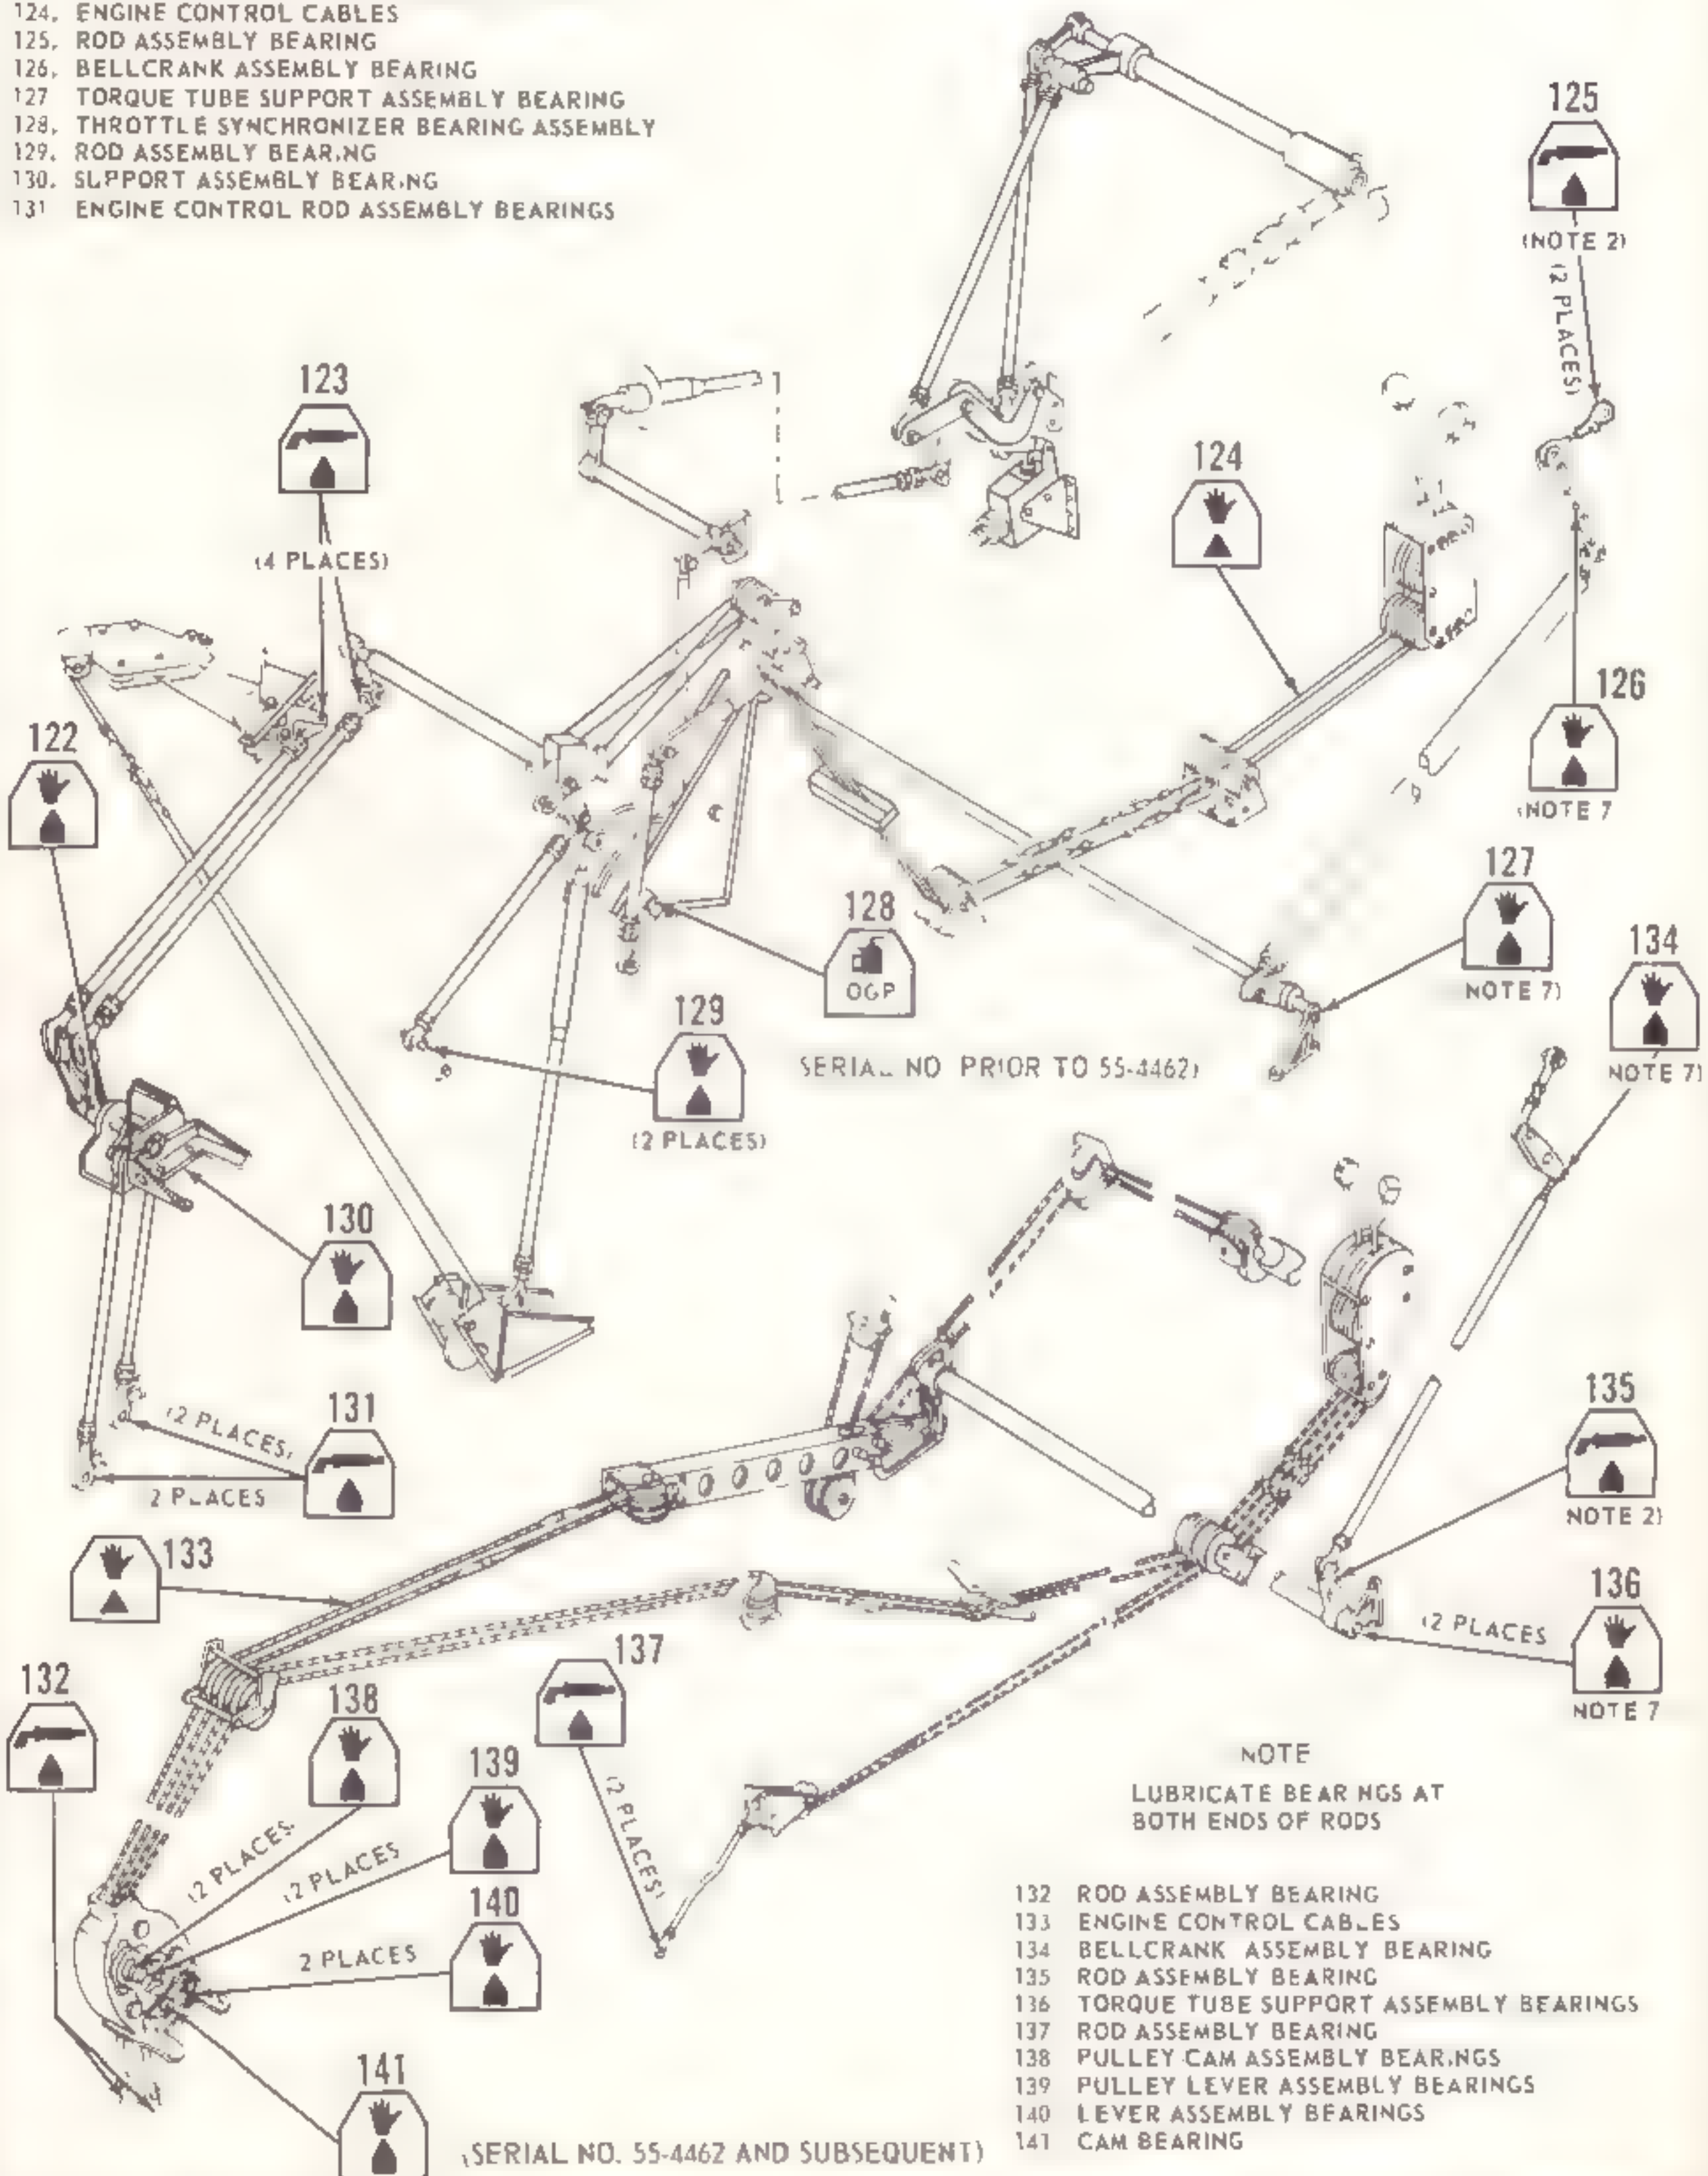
Lubrication chart (Sheet 6 of 7)
